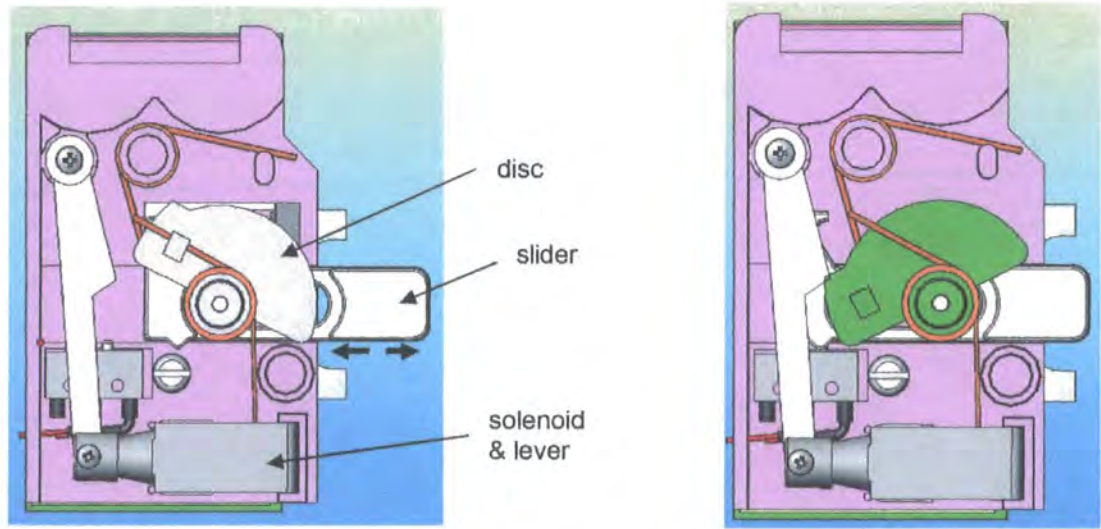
Solenoid latching Design (Engaged/Disengaged)
